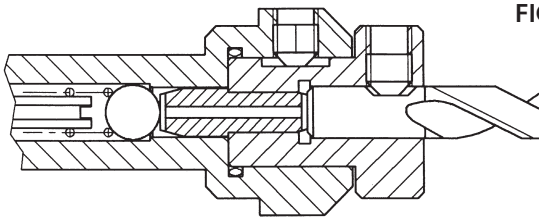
ASSEMBLING THE BIT-SPACER UNIT
